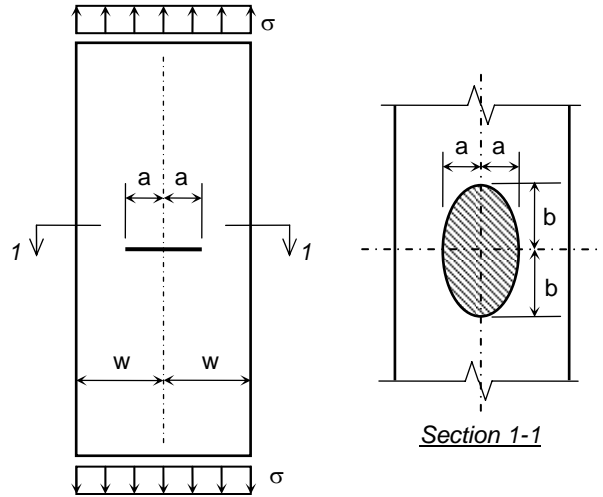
Illustration of fracture mechanics model used to evaluate weld flaws (embedded elliptical crack)
